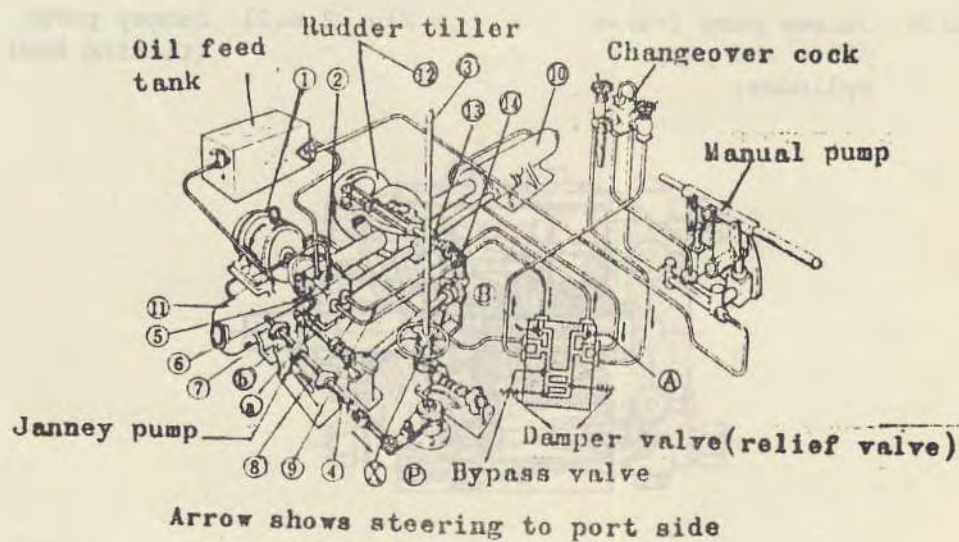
Structure of Janney pump electro-hydraulic rudder gear
